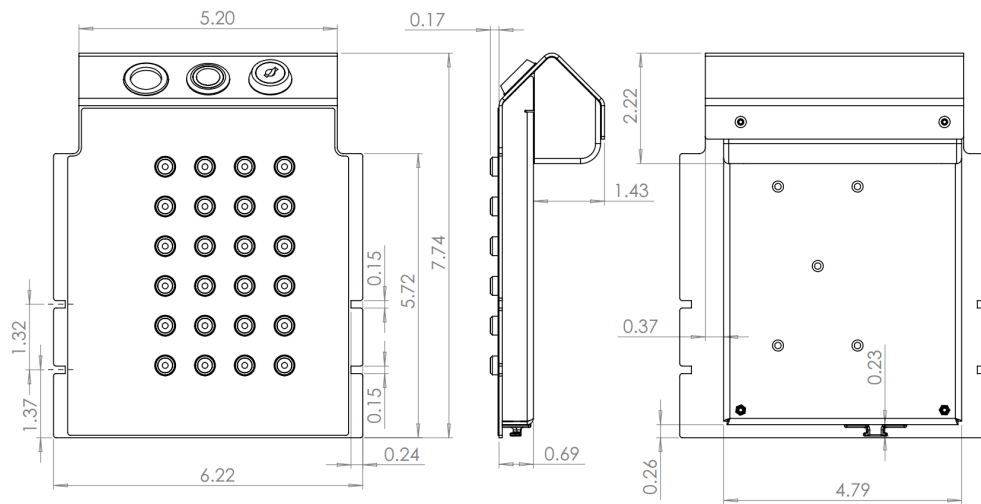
iPDS Switch Panel Mechanical Drawing for Ford Fusion
